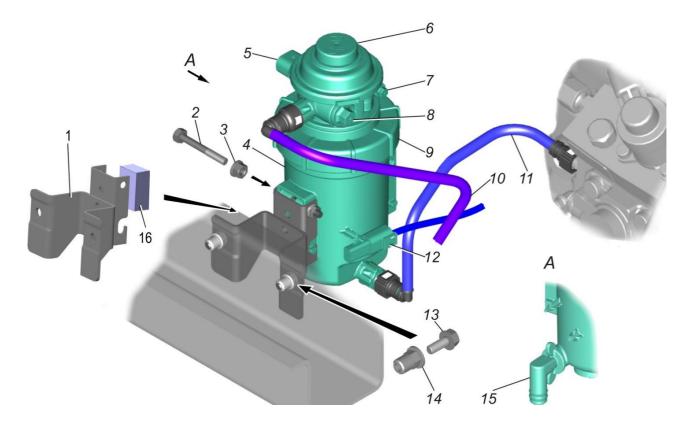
Fine fuel filter installation: 1 - bracket; 2, 13 - bolts; 3 - nut; 4 - filter housing; 5 - fuel heater terminal; 6 - manual fuel-priming pump; 7 - air vent bolt; 8 - plug; 9 - filter housing cover; 10 - fuel supply pipe to the filter; 11 - fuel supply pipe to the HPFP; 12 - fuel water sensor terminal; 14 - threaded rivet; 15 - tap; 16 - spacer gasket.
